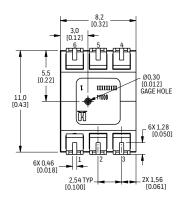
SMT Package Dimensional Drawings (For reference only: mm [in].)
